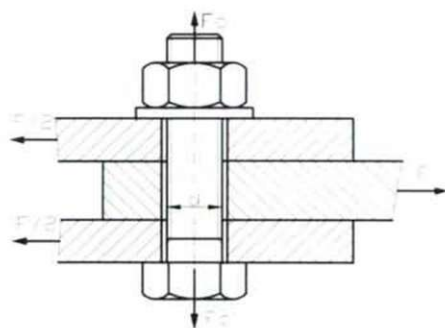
Assembly with screws mounted with clearance, loaded with transversal forces
